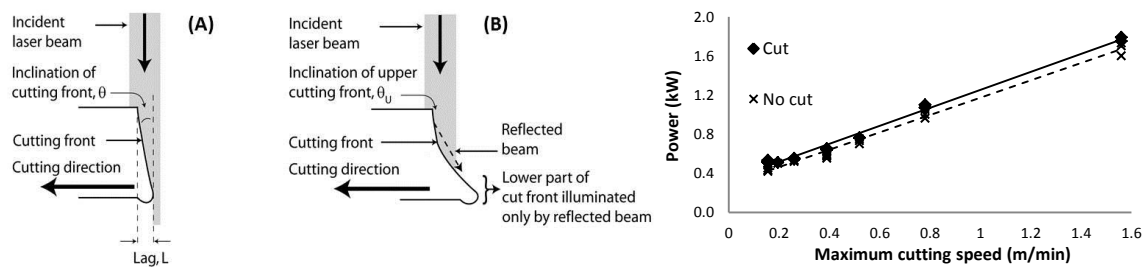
Showing cut front laser beam interaction geometries. (A) Slower cutting speed (steep cut front, some laser beam is lost), (B) Faster cutting speed (less steep cut front, all laser beam interacts with cut edge) [16] (B) Confirmation of the maximum cut speeds measured during these experiments, results shown for 4 mm sheet thickness, 0.26 mm beam diameter.
